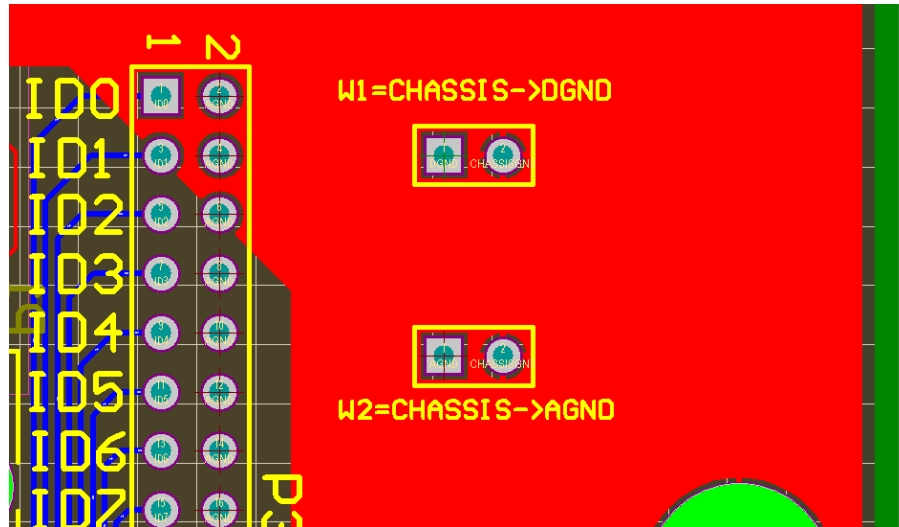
Close-up CAD drawing of the ground coupling jumpers on the backplane
